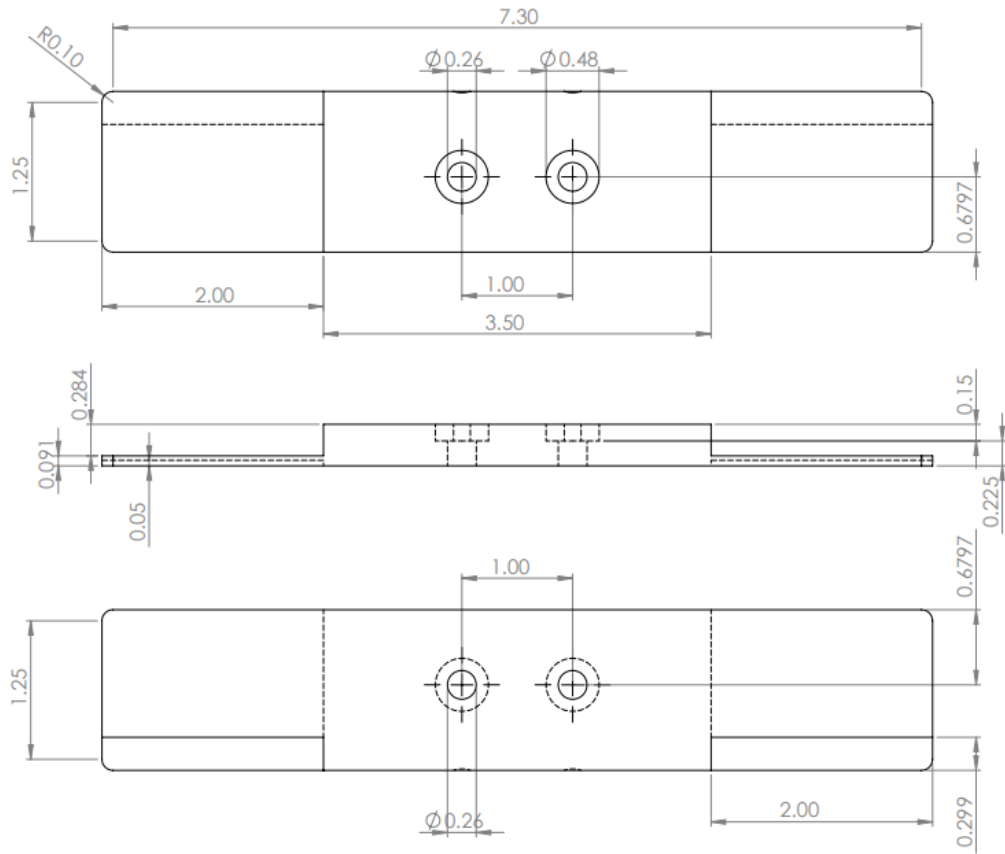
Amplifier Mount Engineering Drawing (IPS)
